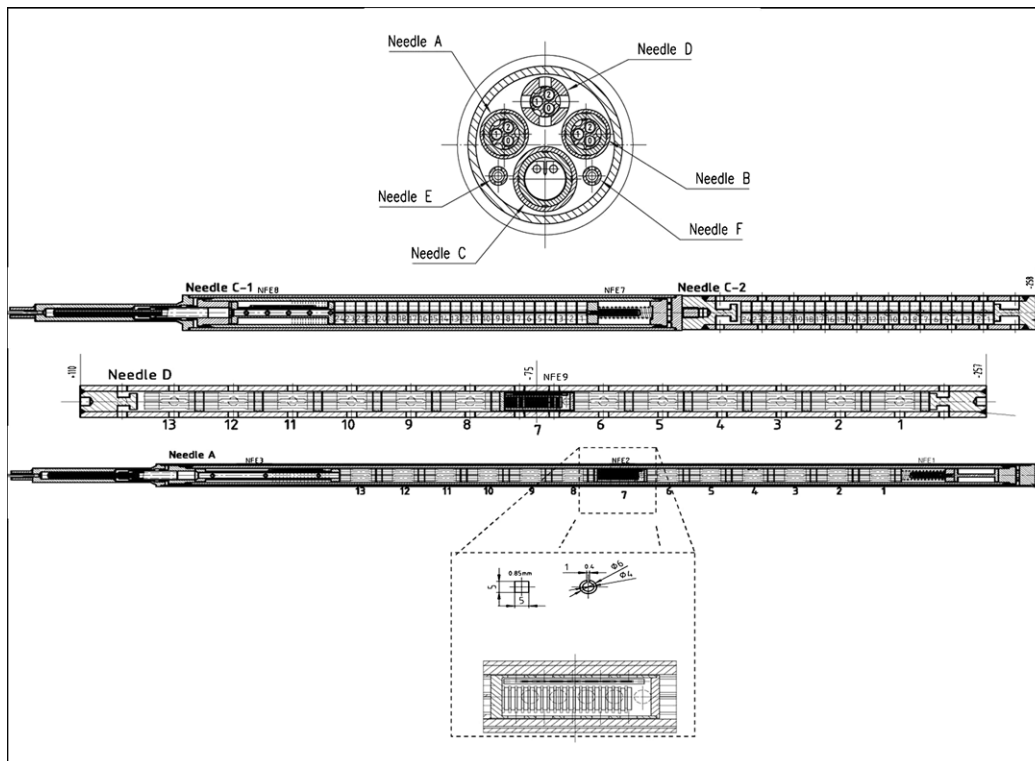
Design drawings of the capsules of Twin Astir. Cross-section showing the position of each capsule (left); capsule with CT specimens (upper right). PbBi filled section on the left and open section in contact with PWR water on the right; capsule for tensiles open to PWR water (middle right); and capsule for tensiles in contact with PbBi (lower right).
